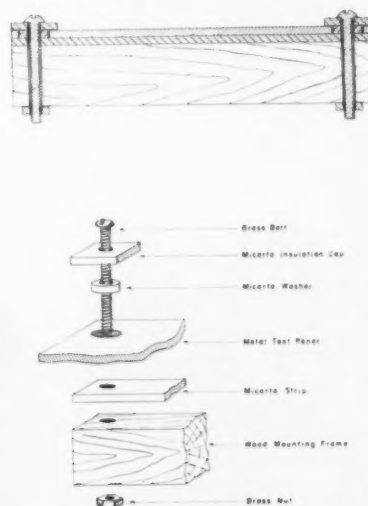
Attachment assembly for the prevention of galvanic effects on marine test panels. (top) Section through head assembly. (bottom) Exploded assembly.
